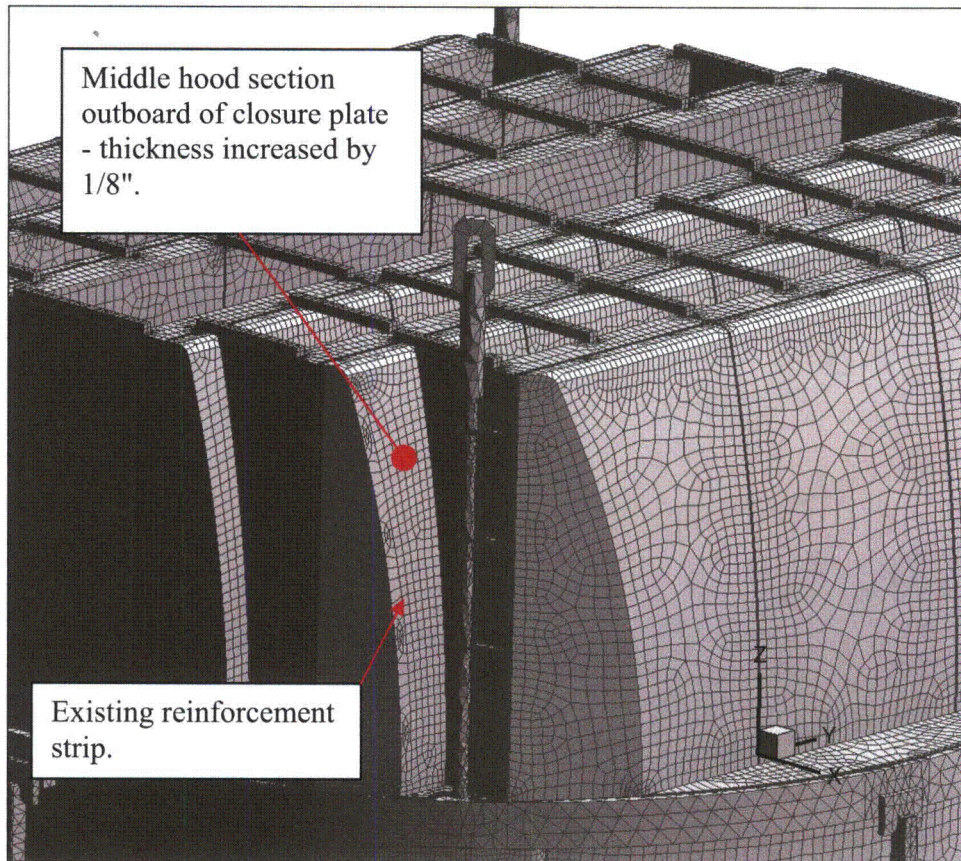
Middle hood section subject to modification and existing reinforcement strip.
